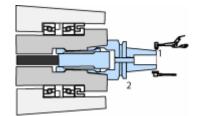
Tool/Tool Holder assembly to spindle - direct transfer function measurement at the tip of the holder shank (TF 11)
